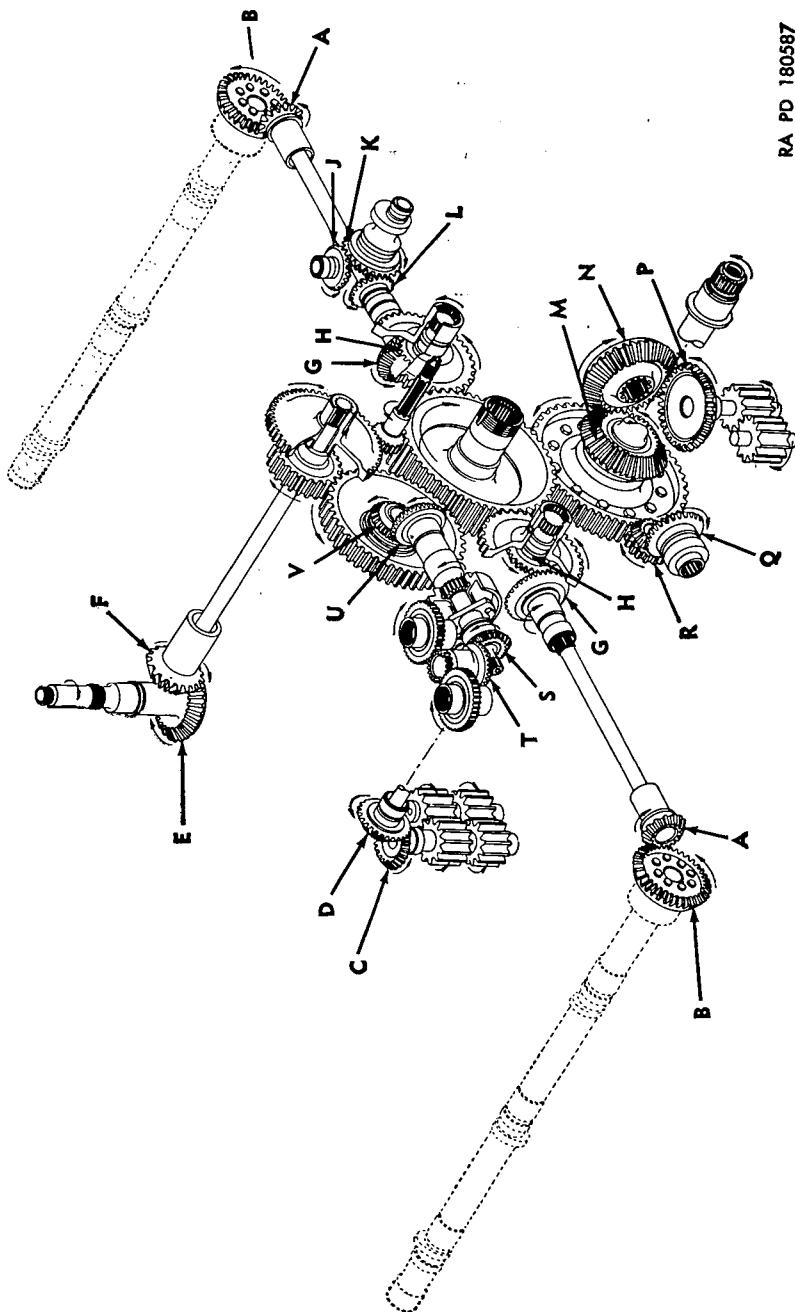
Repair and rebuild standard points of measurement for accessory case drive gearing (rear).
